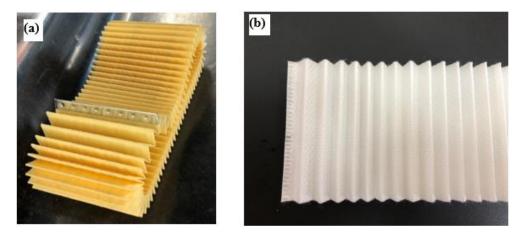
Joints of filter papers. a) Metal clips, b) Ultrasonic welding.
